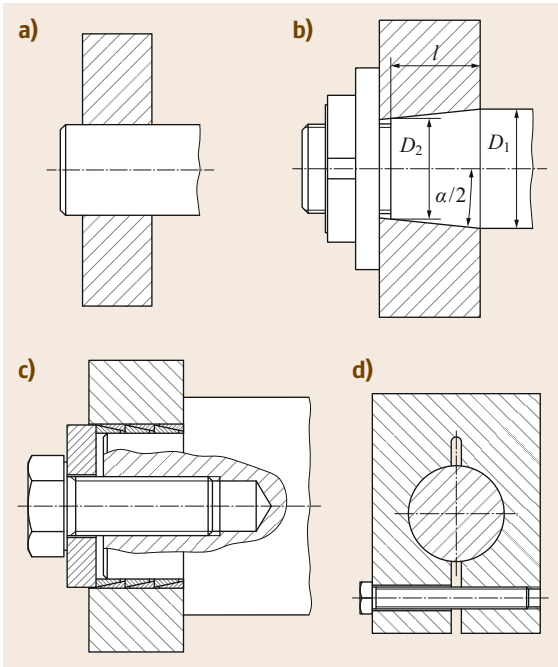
d Examples of frictional connections. (a) Cylindrical press-fit assembly, (b) conical press-fit assembly, (c) press-fit connection with intermediate parts (tapered clamping elements), and (d) compression connection
